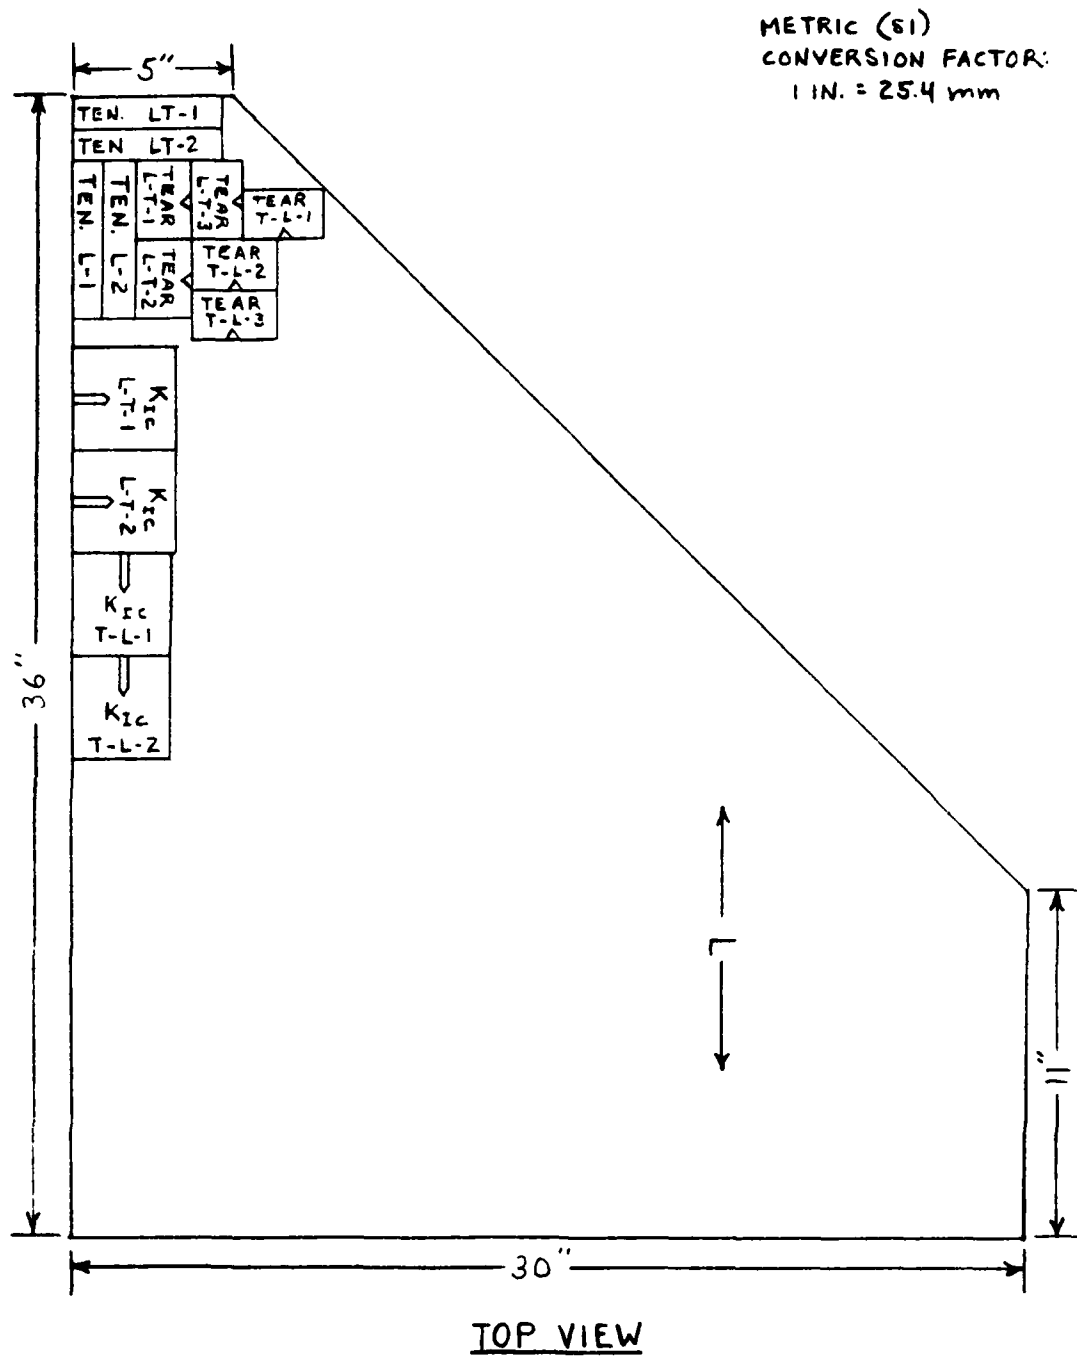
SIZE AND SHAPE OF TWO PIECES OF COMMERCIALY PRODUCED ALLOY 2020-T651 PLATE (1.281 IN. THICK) — SAMPLE 523713 (A+B)
